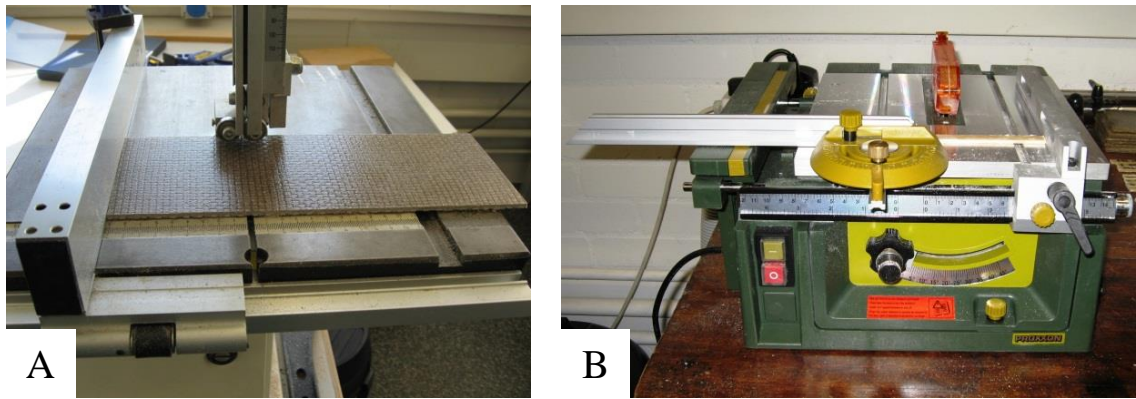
(A) Hopsack flax fabric in polyester laminate machined with a band saw (B) Table top precision cutter used for machining smaller samples
